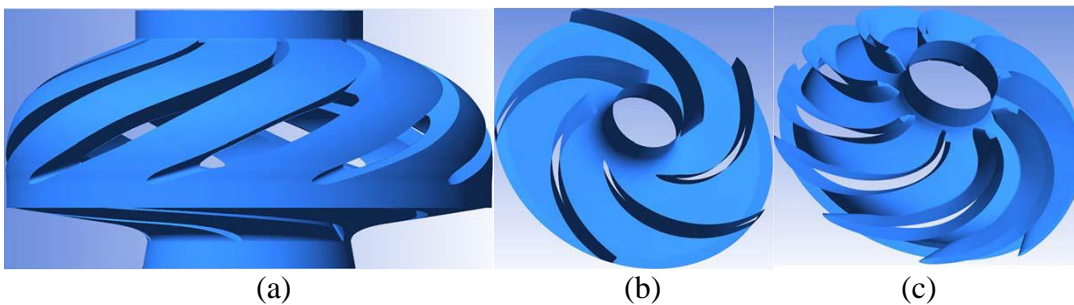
3D Model of TE-2700 ESP: (a) Stage Assembly, (b) Impeller, (c) Diffuser (Zhu et al.
